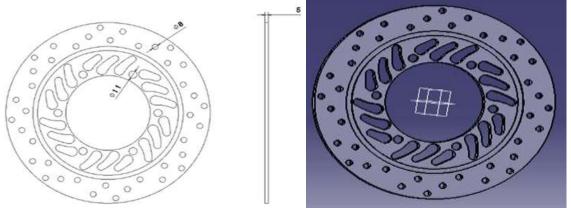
CAD model of existing disc rotor Fig. 7 CATIA model of existing Disc rotor In disc rotor 3 as shown in fig., disc rotor 3 has been of 6 holes with diameter 10 mm arranged equally same. Original disc brake has been added with rectangular shaped vanes on inner side and surrounding 40 holes of diameter 8mm
